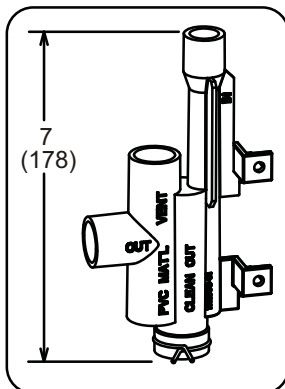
Trap / Drain Assembly Using 1/2" PVC or 3/4" PVC Cold End Header Box with 1/2 Drain Connection
